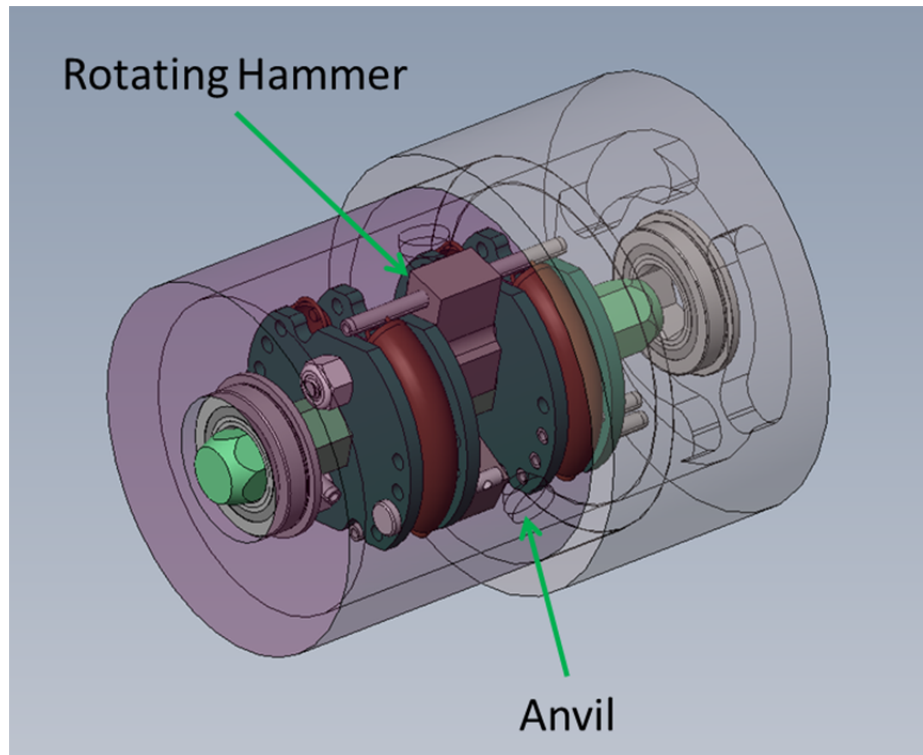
CAD drawing of one hammer assembly of the re-designed source. Three of these assemblies were installed in the final source used in field testing.
